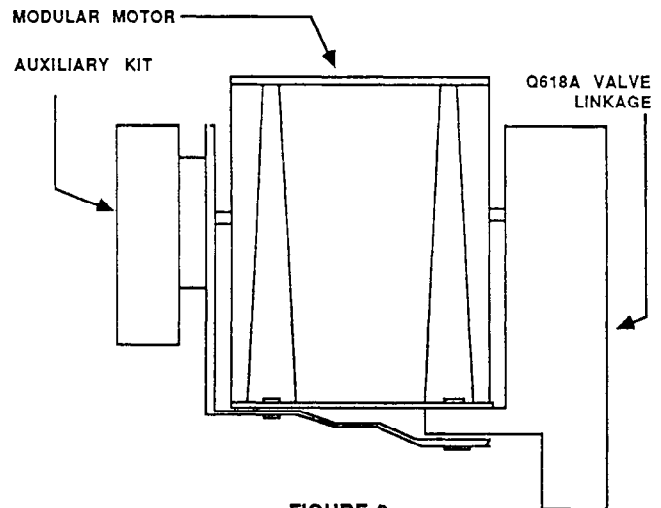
INSTALLATION OF MODULAR MOTOR AND AUXILIARY KITS ON HONEYWELL Q618A VALVE LINKAGE
